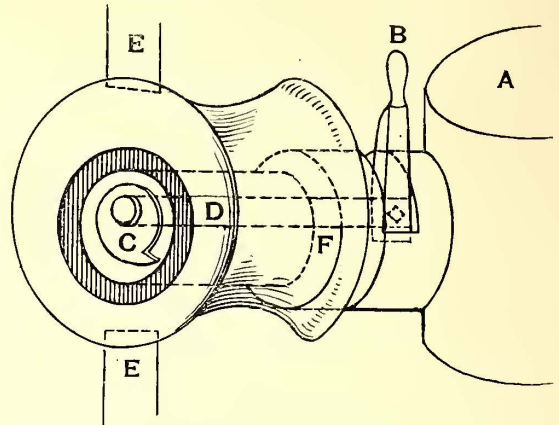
LATHE FOR SMOOTHING BOTH ENDS OF TROLLEY WHEEL
